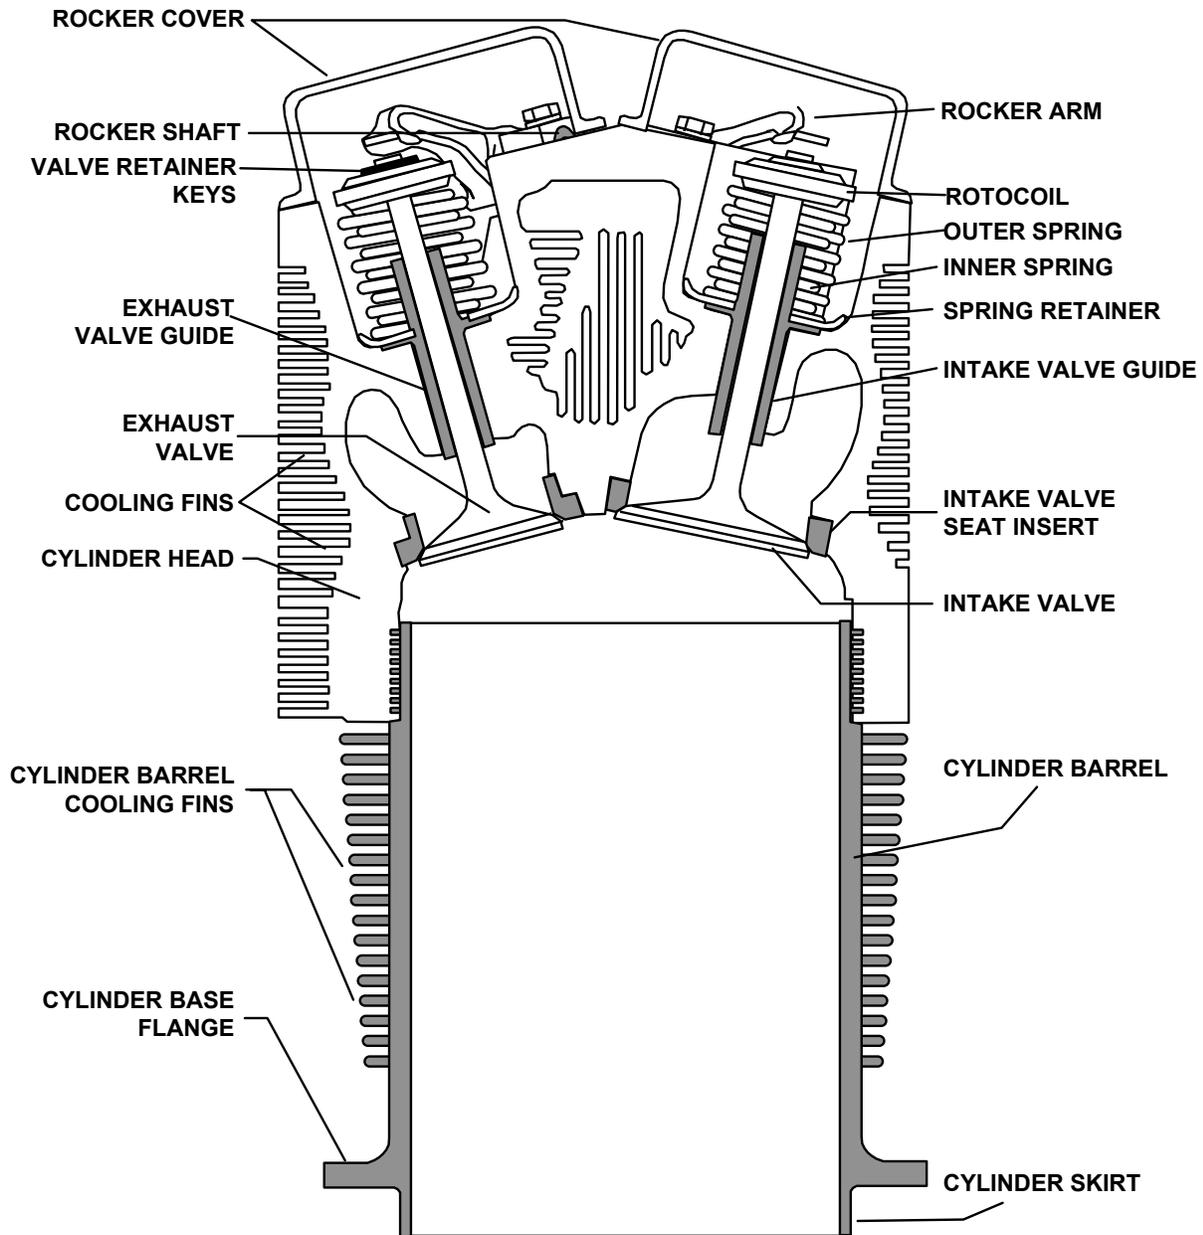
CYLINDER ASSEMBLY DESCRIPTION
